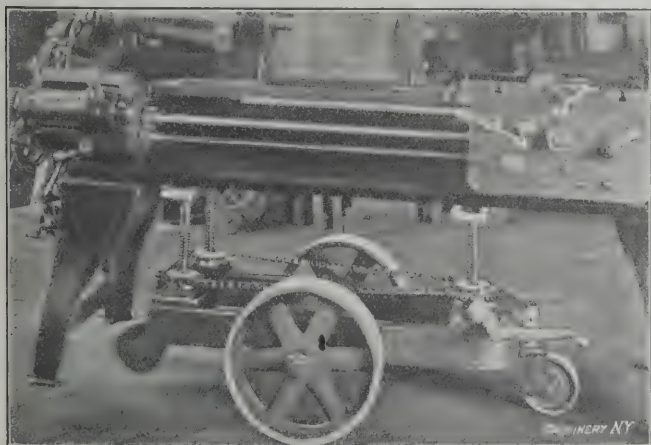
An Elevating Truck for Raising and Moving Lathes
